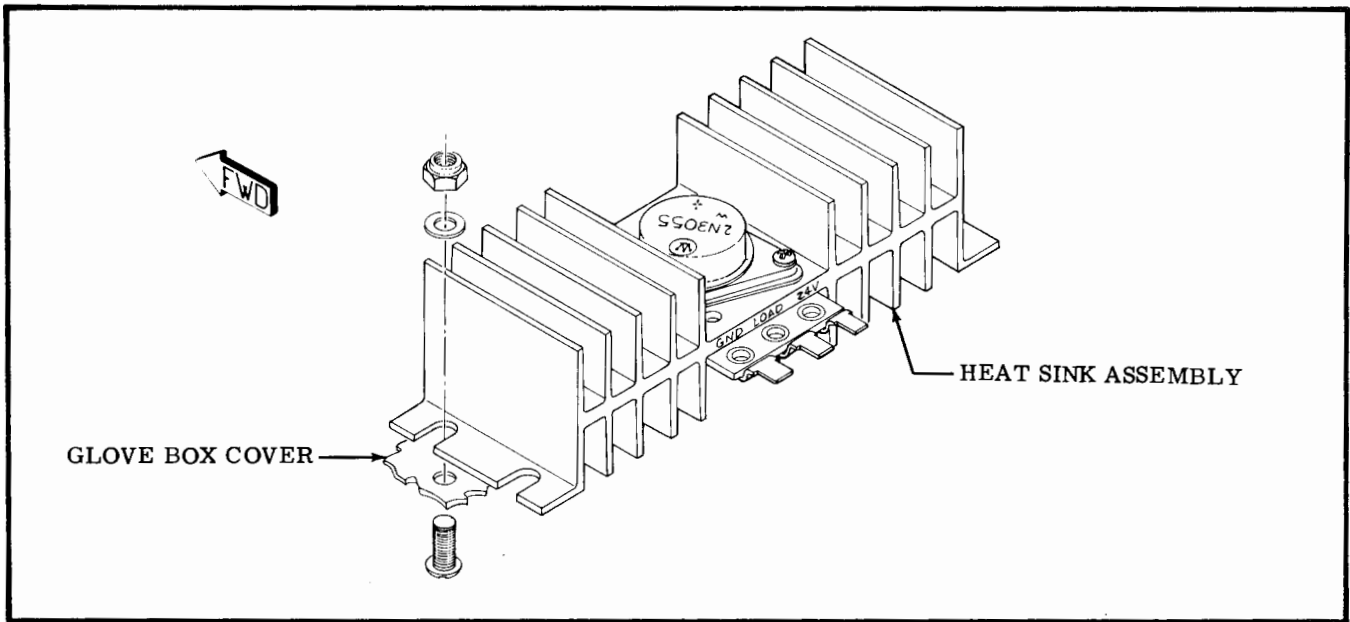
Heat Sink Assembly (Voltage Regulator) Installation
